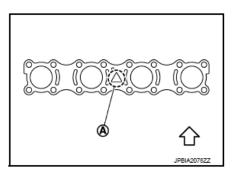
Identifying Position Of Installing Exhaust Manifold Gasket Courtesy of NISSAN MOTOR CO., U.S.A.
